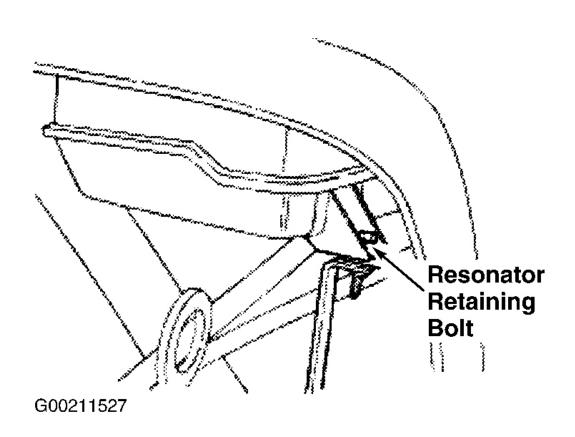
Locating Resonator Retaining Bolt Courtesy of FORD MOTOR CO.
